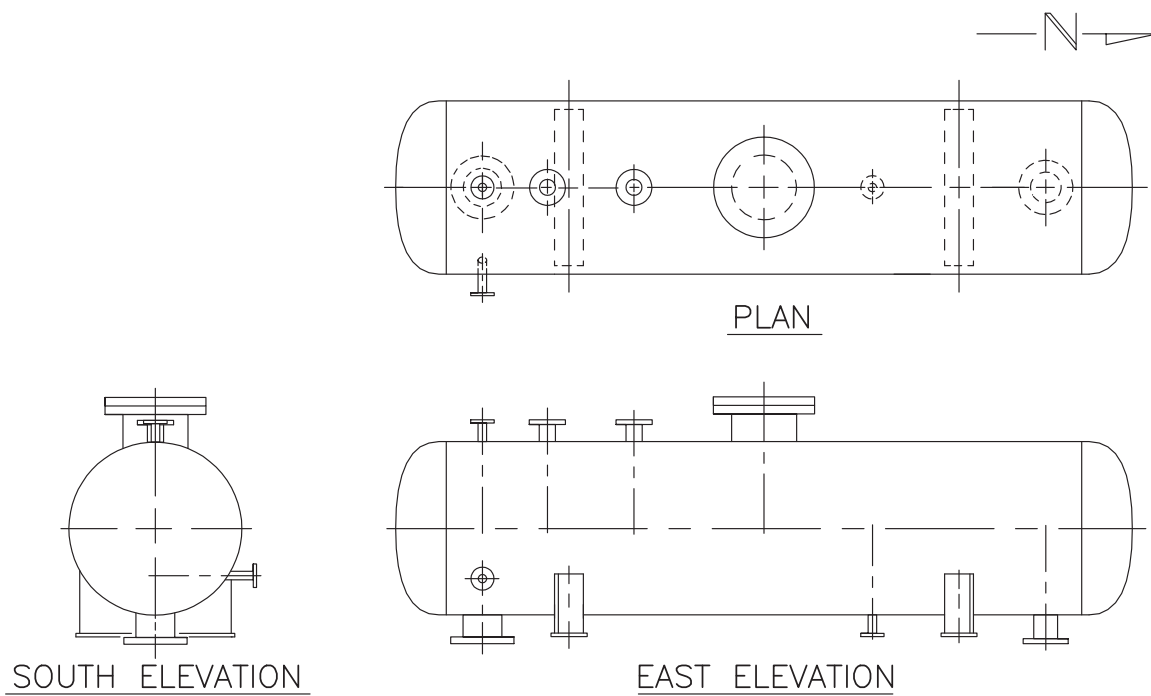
Plan and elevation views of a horizontal vessel.
